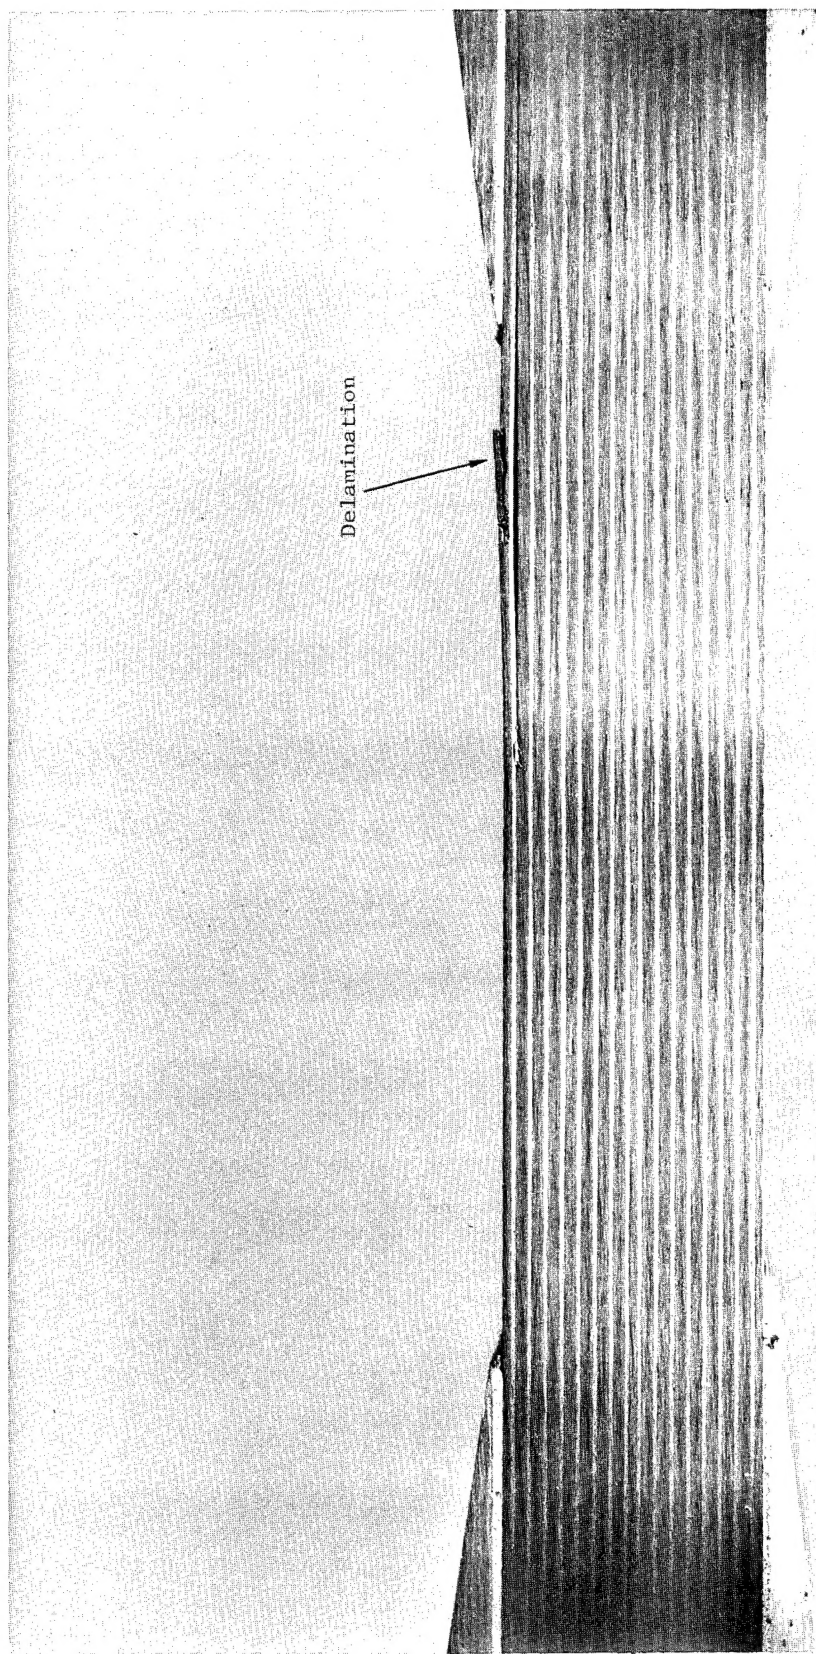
Photograph of a Laminate C Specimen (4282-26) After Fatigue Failure; Test Series 8
